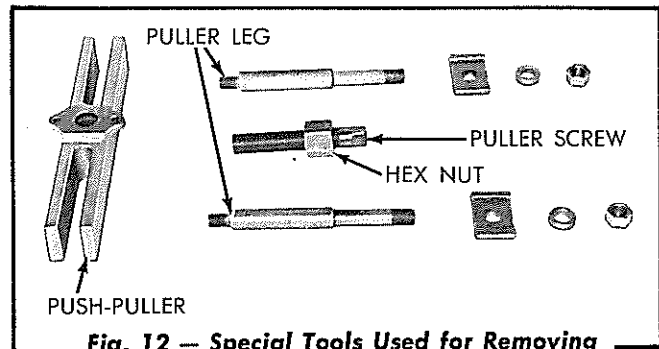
Special Tools Used for Removing Steering Clutch Shaft
